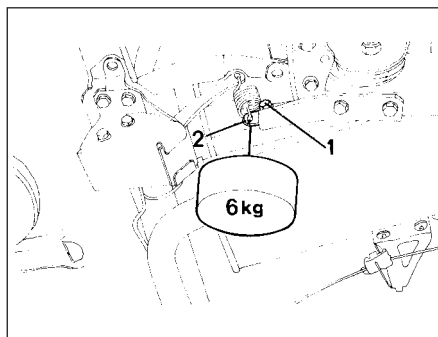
Weight attachment point for pressure regulating valve adjustment (Sec 10)
